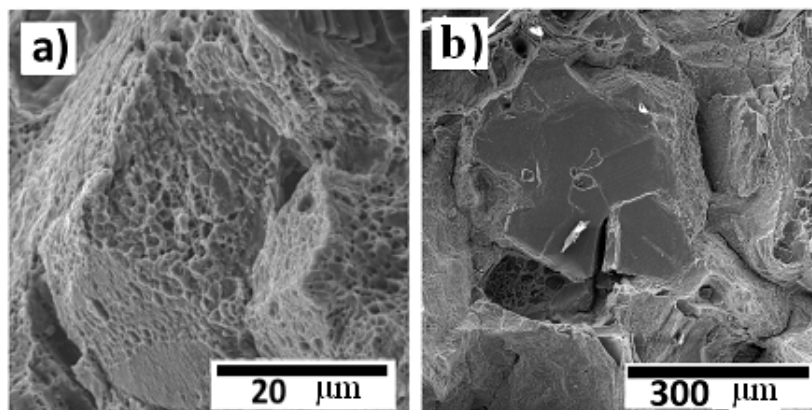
The sample fracture surface under impact loading after exploitation: a) viscous intergranular fracture area; b) quasi-brittle intergranular fracture facets.
